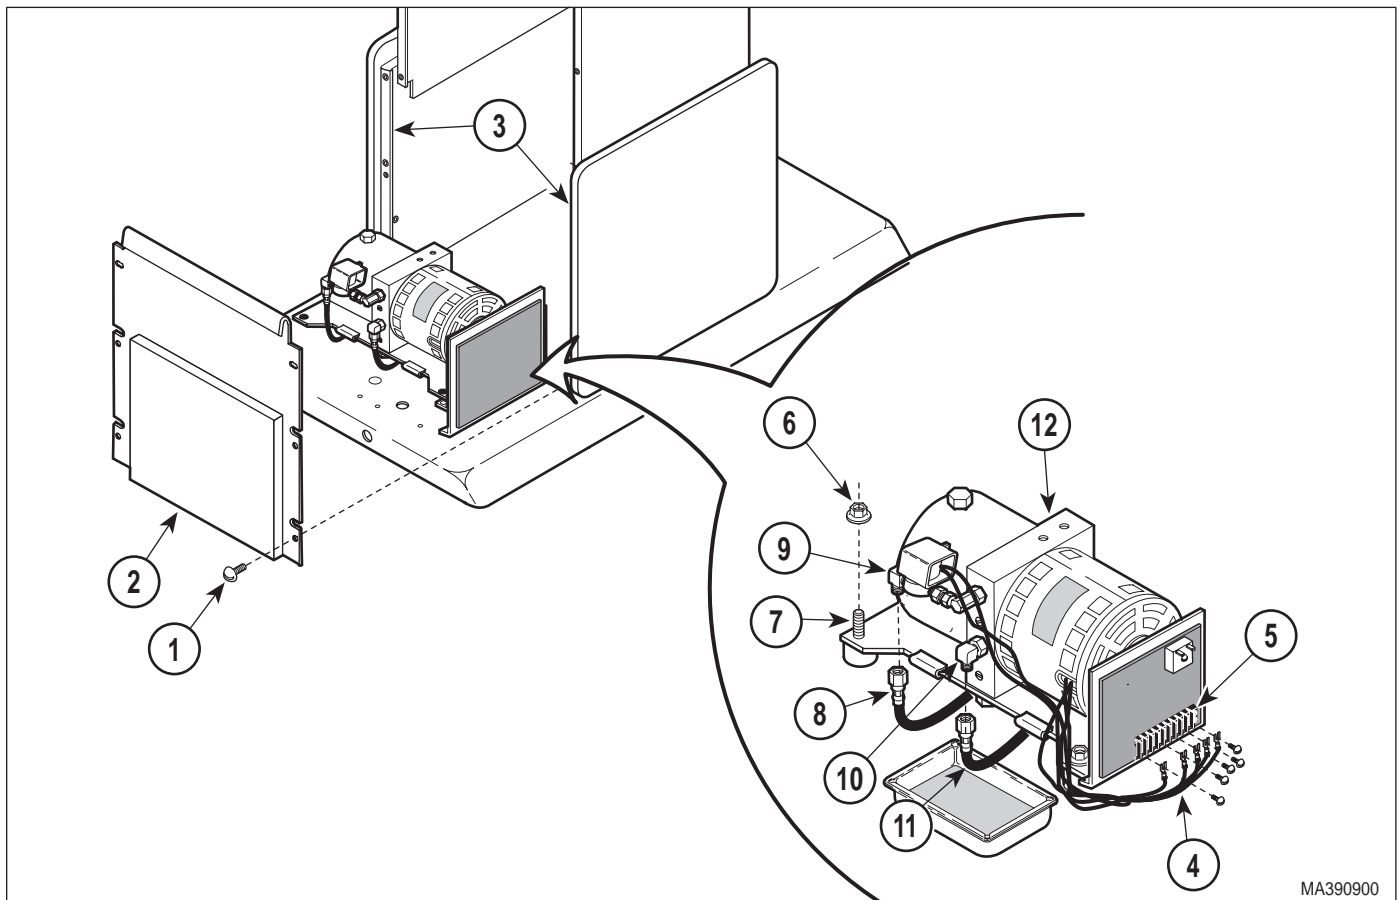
Motor Pump Assembly - Complete Removal / Installation
